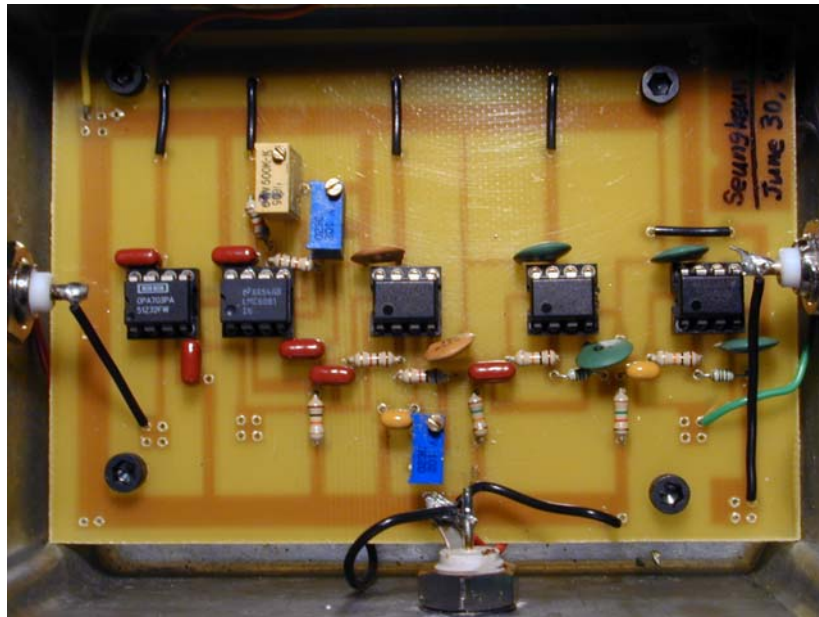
10. The completed circuitry assembled onto the PCB board. The PCB board is fabricated with standard lithography and etching process on to the blank PCB board. Note that a voltage follower is added at the end of the circuitry to provide effective isolation of the inductor load, *i.e.*, excitation coil from the signal conditioning circuitry.
